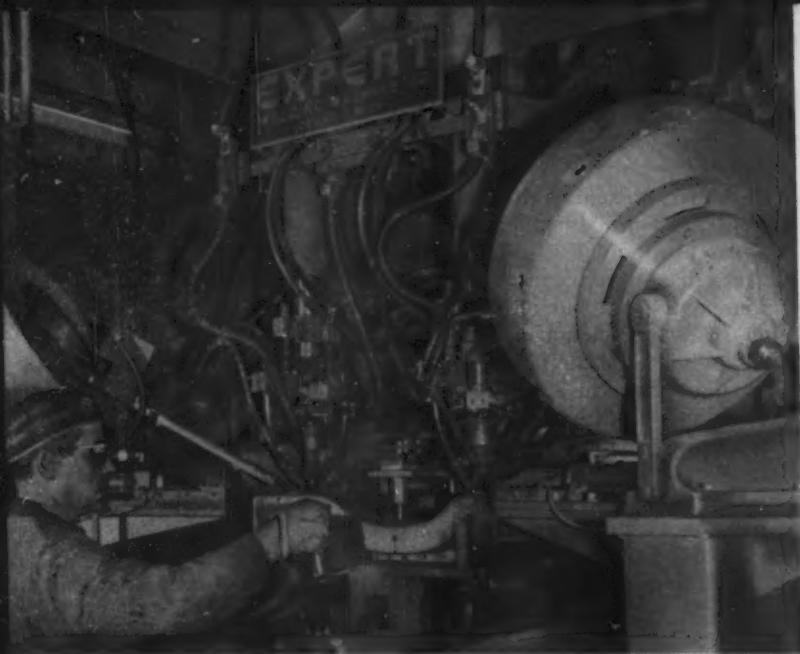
Automatic, cam-controlled machine for welding two reinforcing members inside the ends of the channel-shaped No. 1 cross-member.
